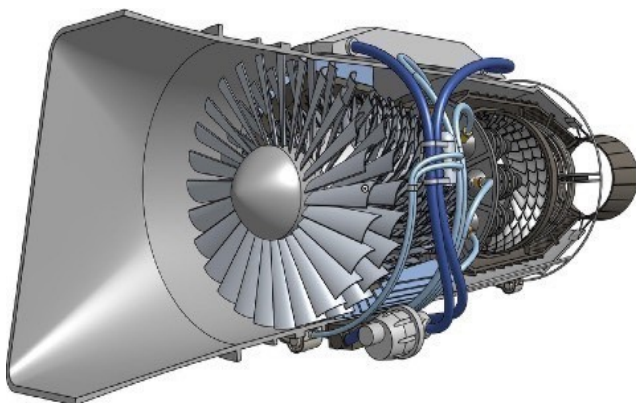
Front perspective view showing the fan, compressor, combustor, turbine and fuel piping.
